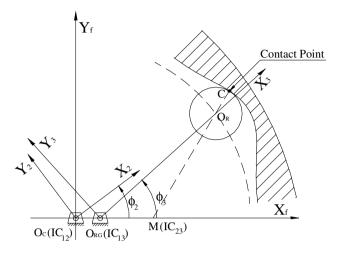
Coordinate systems of a rotating ring gear type hypocycloid reducer.
